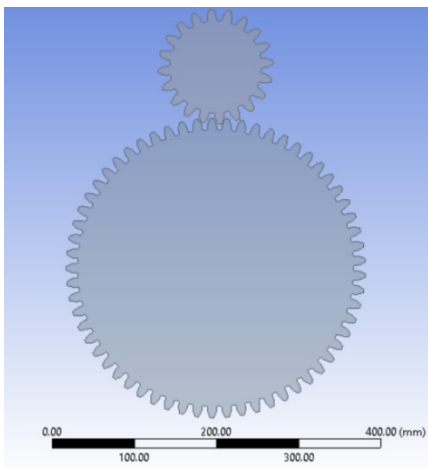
Gearing of the wheels in the wind turbine gearbox.
